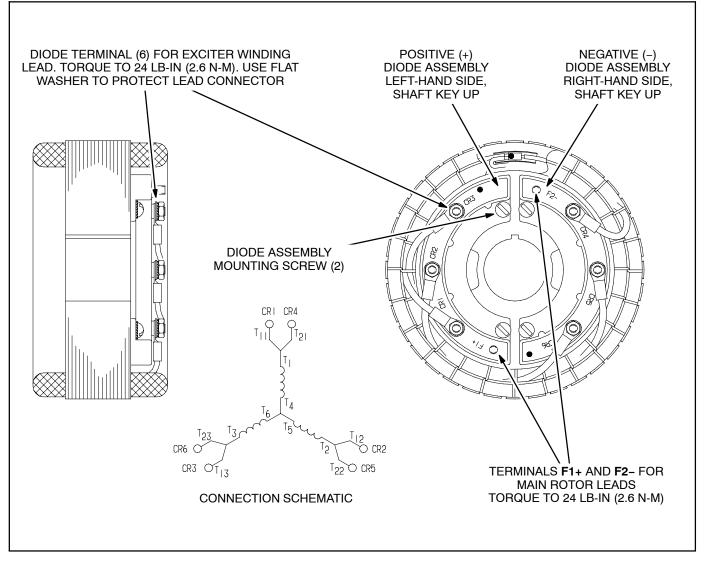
ROTATING RECTIFIER ASSEMBLY
